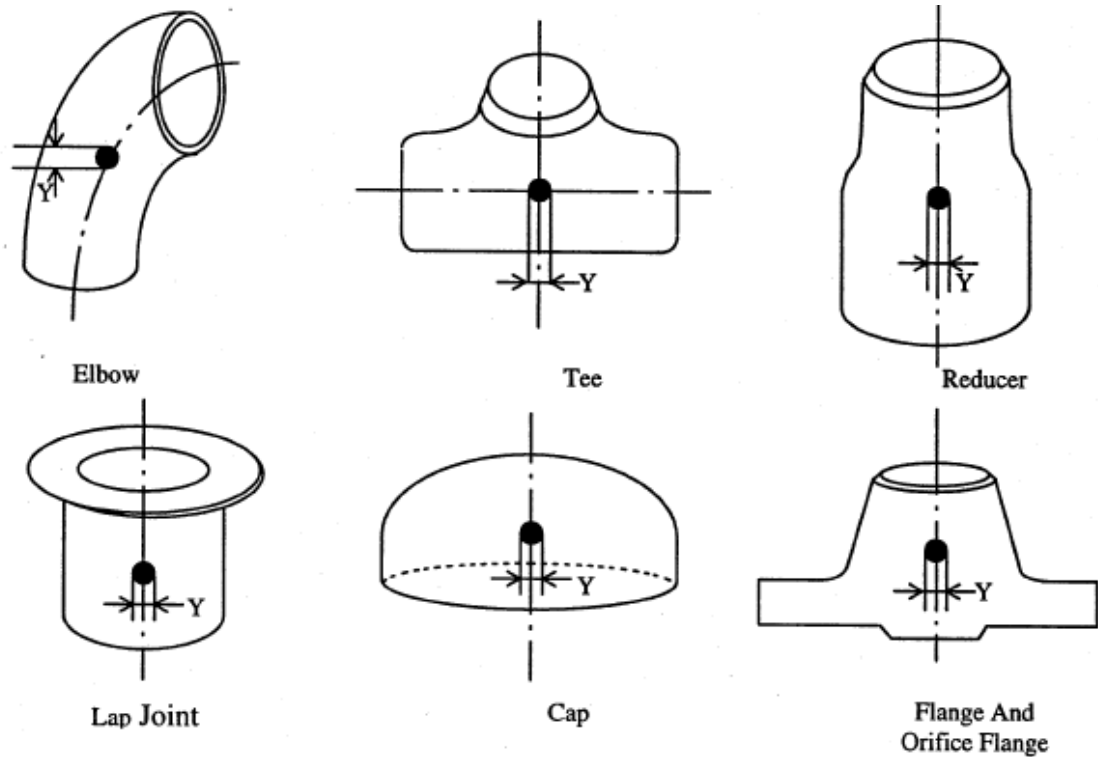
(b) COLOR CODING OF BUTT WELDING FITTINGS
